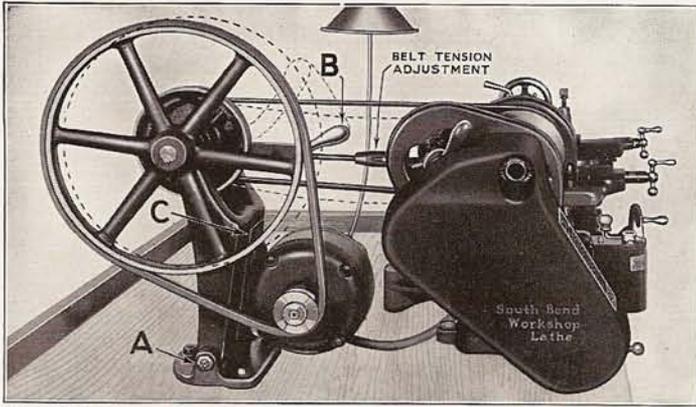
The 9-inch No. 5 "Workshop" South Bend Back-Geared, Screw Cutting Lathe Equipped with Horizontal Motor Drive with Belt Tension Adjustment.
